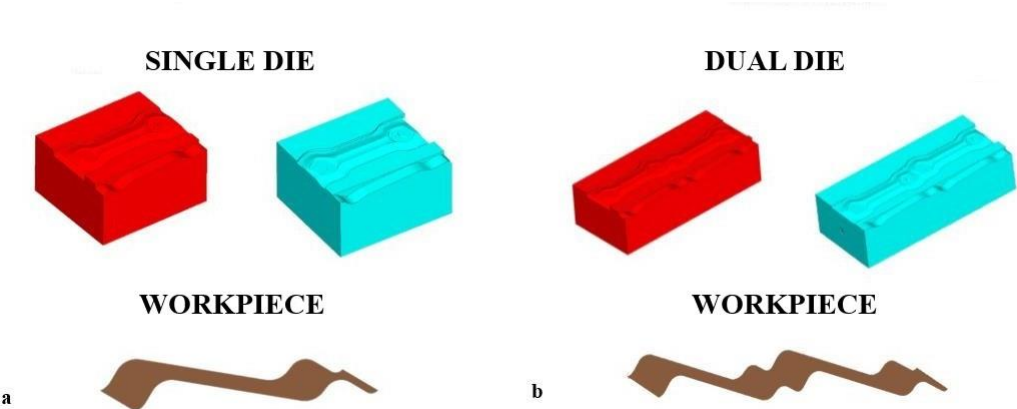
a) Single die and workpiece b) Dual die and workpiece
